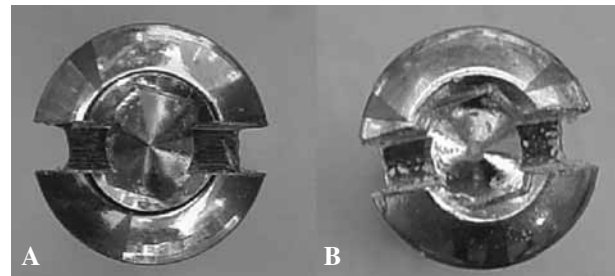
A. Auxiliary slot screw head design modification. B. Typical auxiliary slot screw head following extraction.
